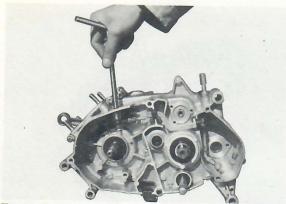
Loosening oil line union bolt with 8 mm wrench
